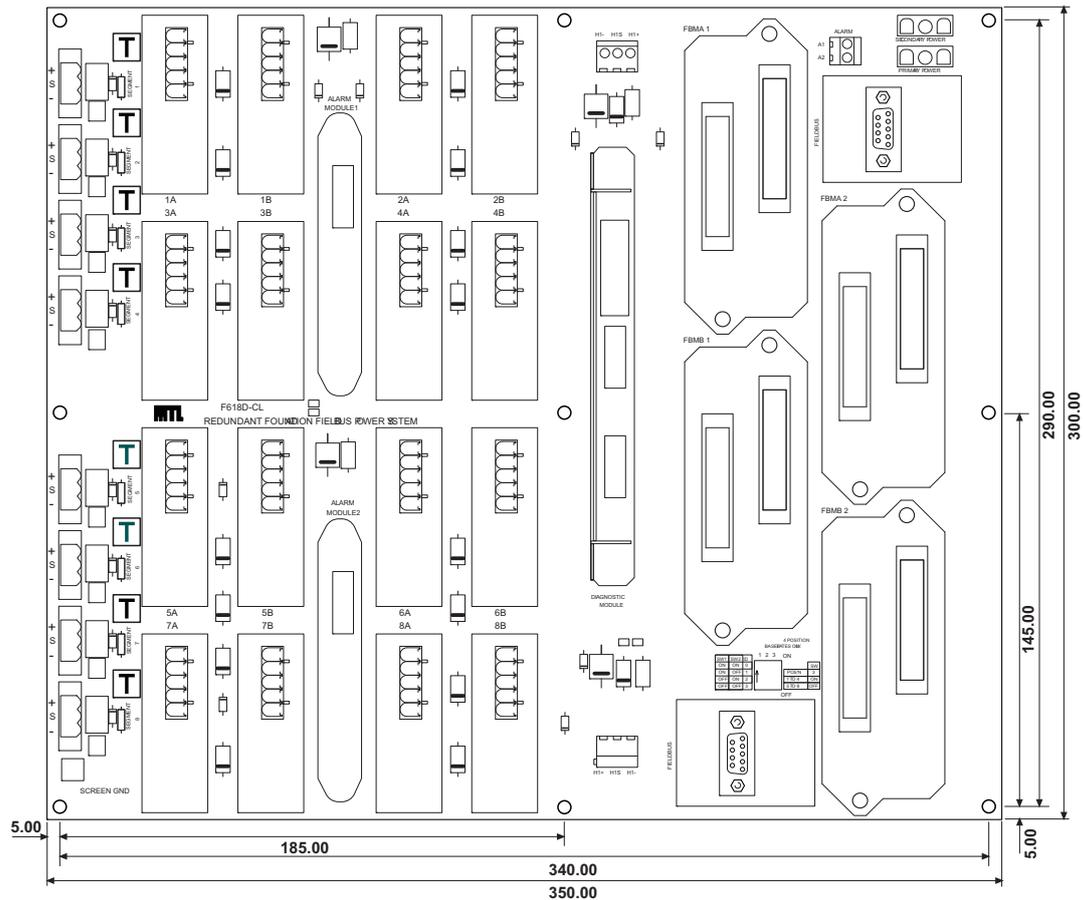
F618D baseplate dimensions and mounting hole locations - see text for height dimension
